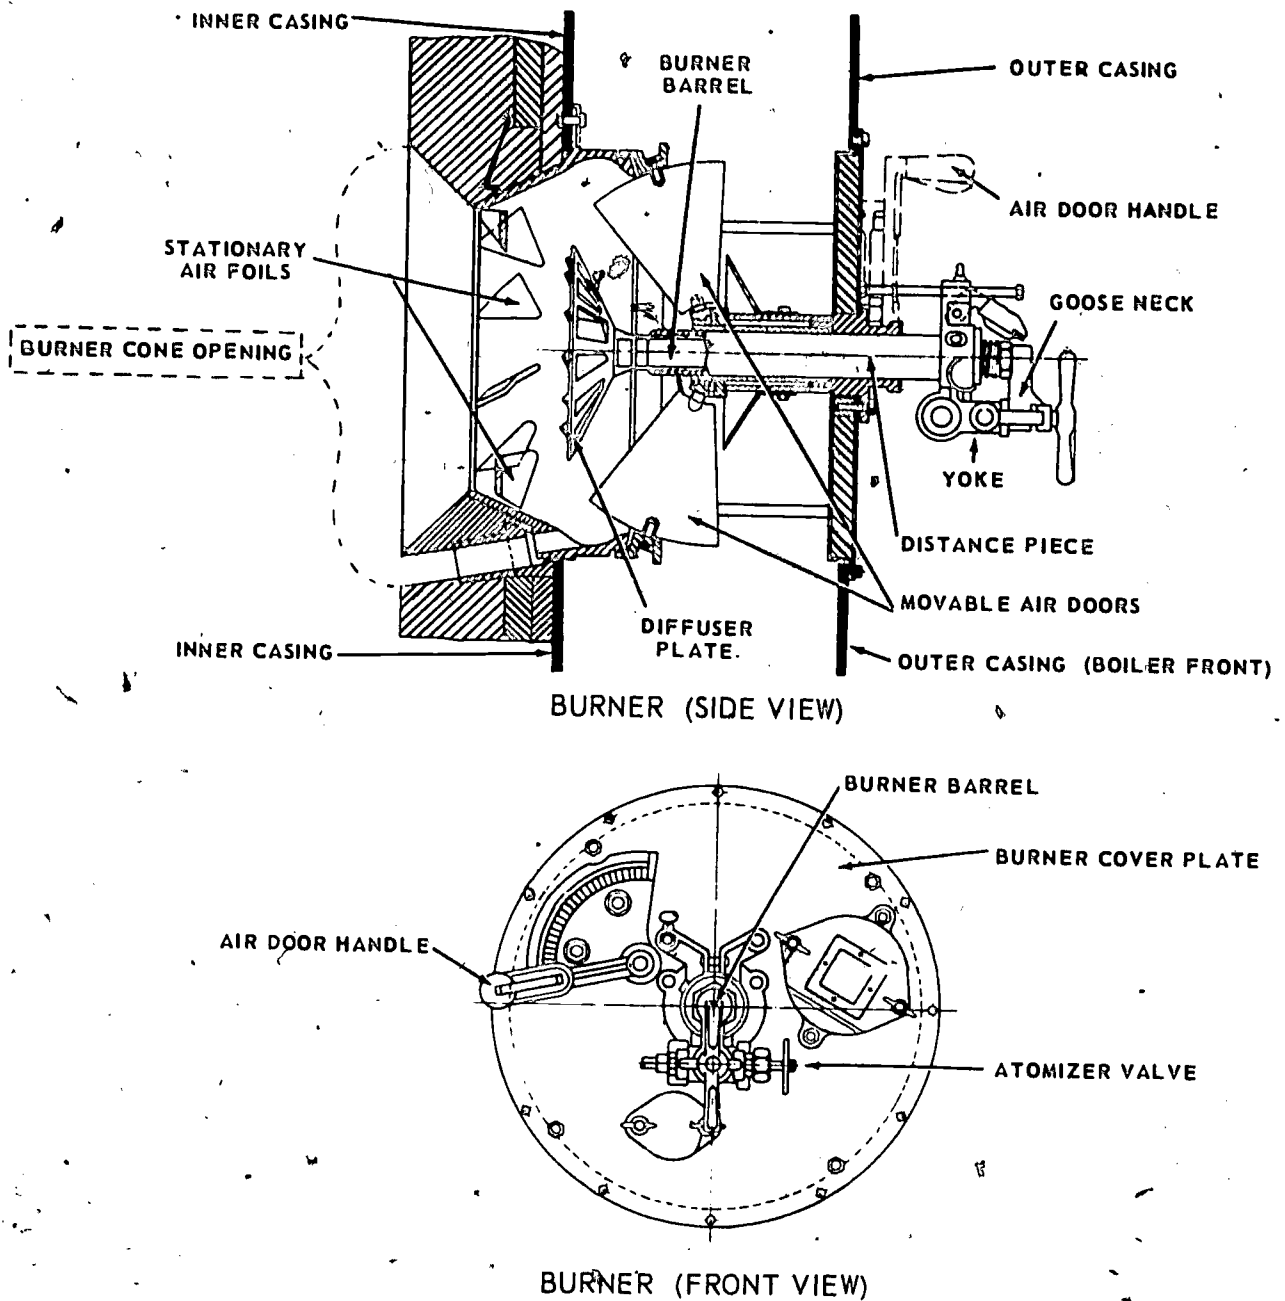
Cross-sectional view of Babcock and Wilcox Carolina-type fuel oil burner with straight-through-flow atomizer.
